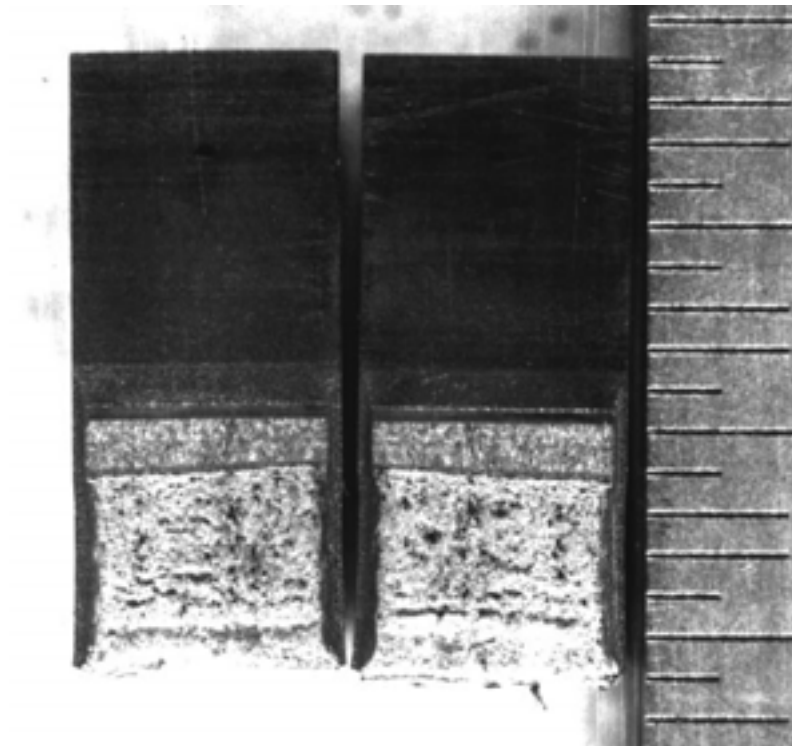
Fracture surface of specimen 184-38 tested at 288°C
